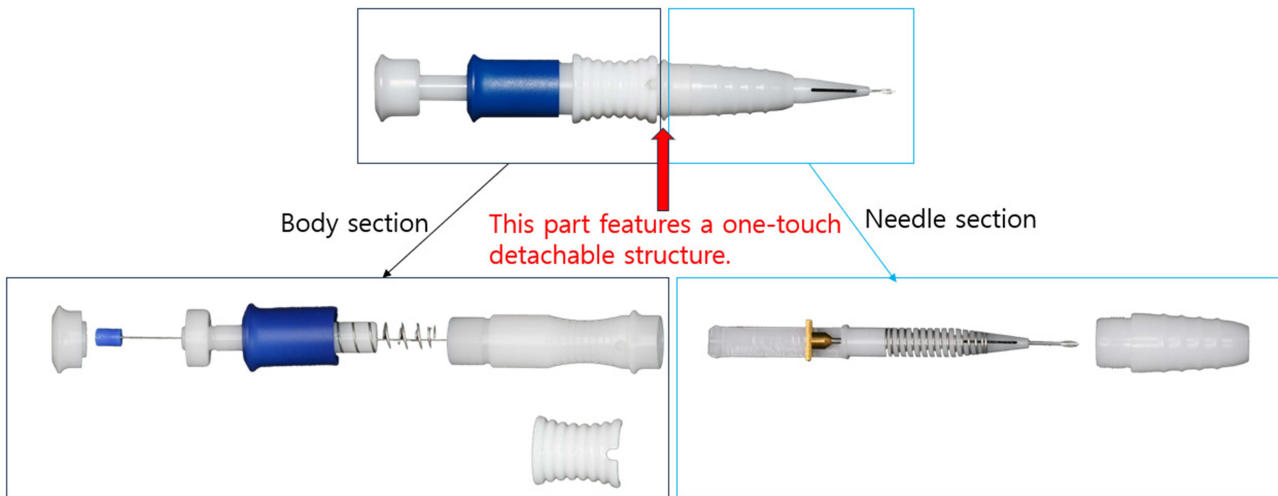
One-touch modular disassembly of the implanter. Photographs demonstrating the one-touch detachable structure separating the body section and needle section. The red-colored arrow and text highlight the detachable junction between the body and needle sections. This modular design allows rapid needle exchange and minimizes workflow interruption during prolonged hair transplantation procedures.
